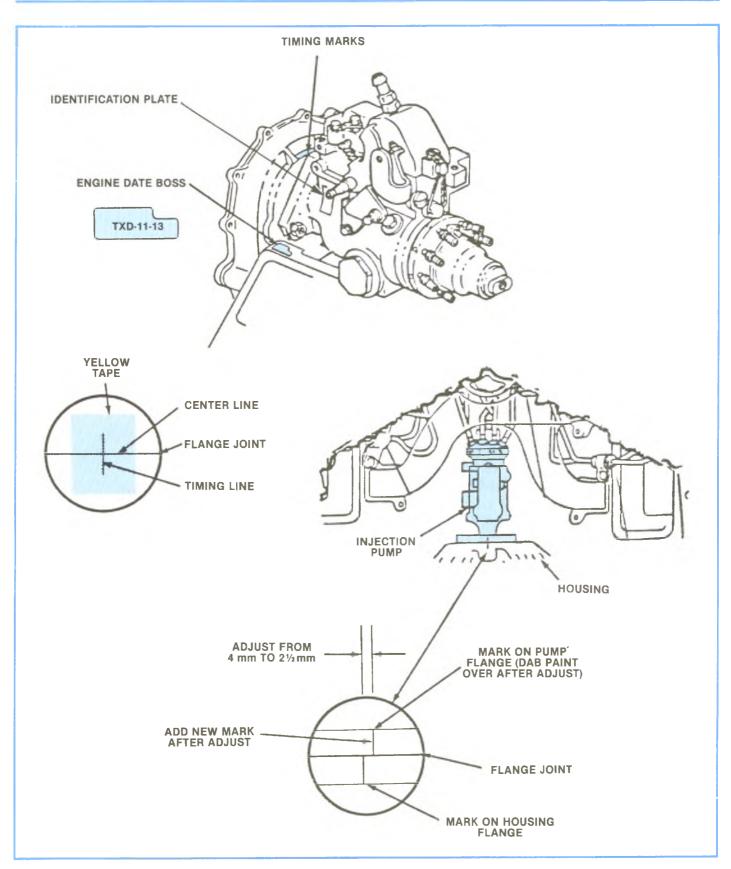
, Timing Adjustment, Heavy Duty 6.2L Diesel Engine.
